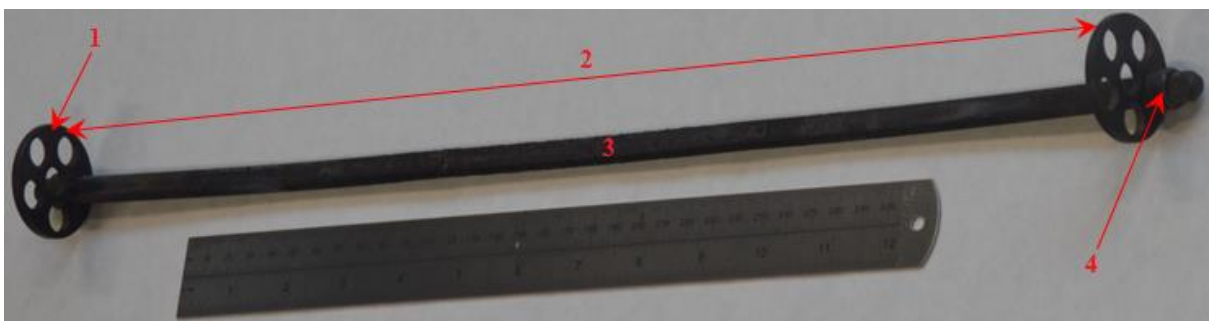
Customised heat treatment jig: (1) Circular plate with five holes of diameter 5 mm; (2) Jig length of 450 mm; (3) Threaded steel rod; and (4) Nut used for tightening the circular plate and threaded rod.
